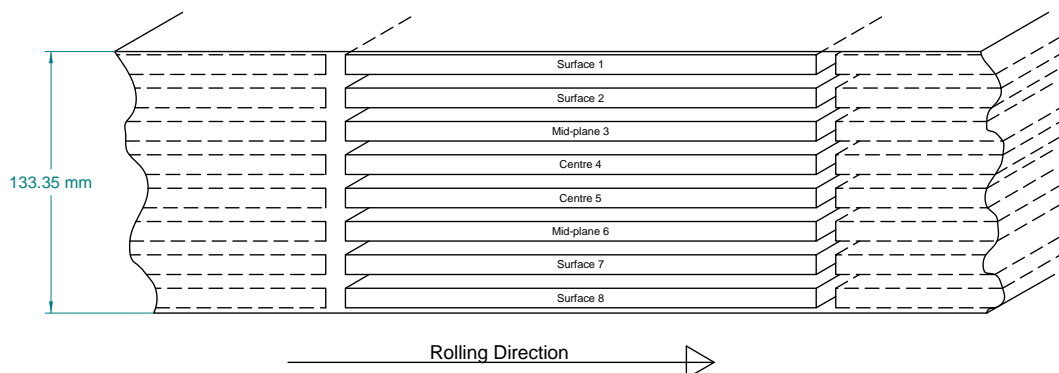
The orientation of the specimen blanks cut from the 133 mm thick 7050-T7451 plate showing the nomenclature used to identify the position of each specimen within the plate
